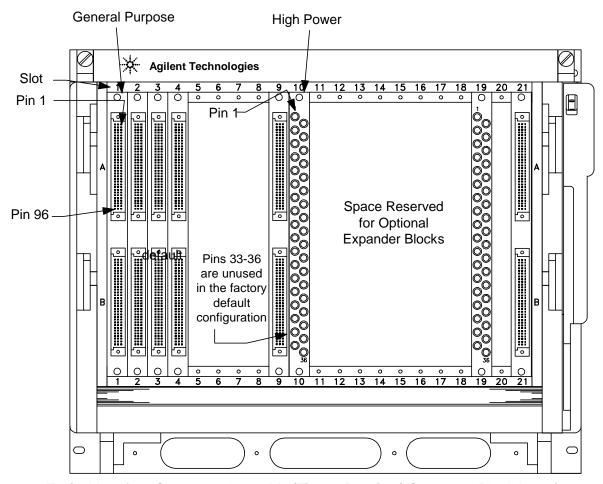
Typical Interface Connector Assembly (Fixture Receiver) Connector Block Locations
